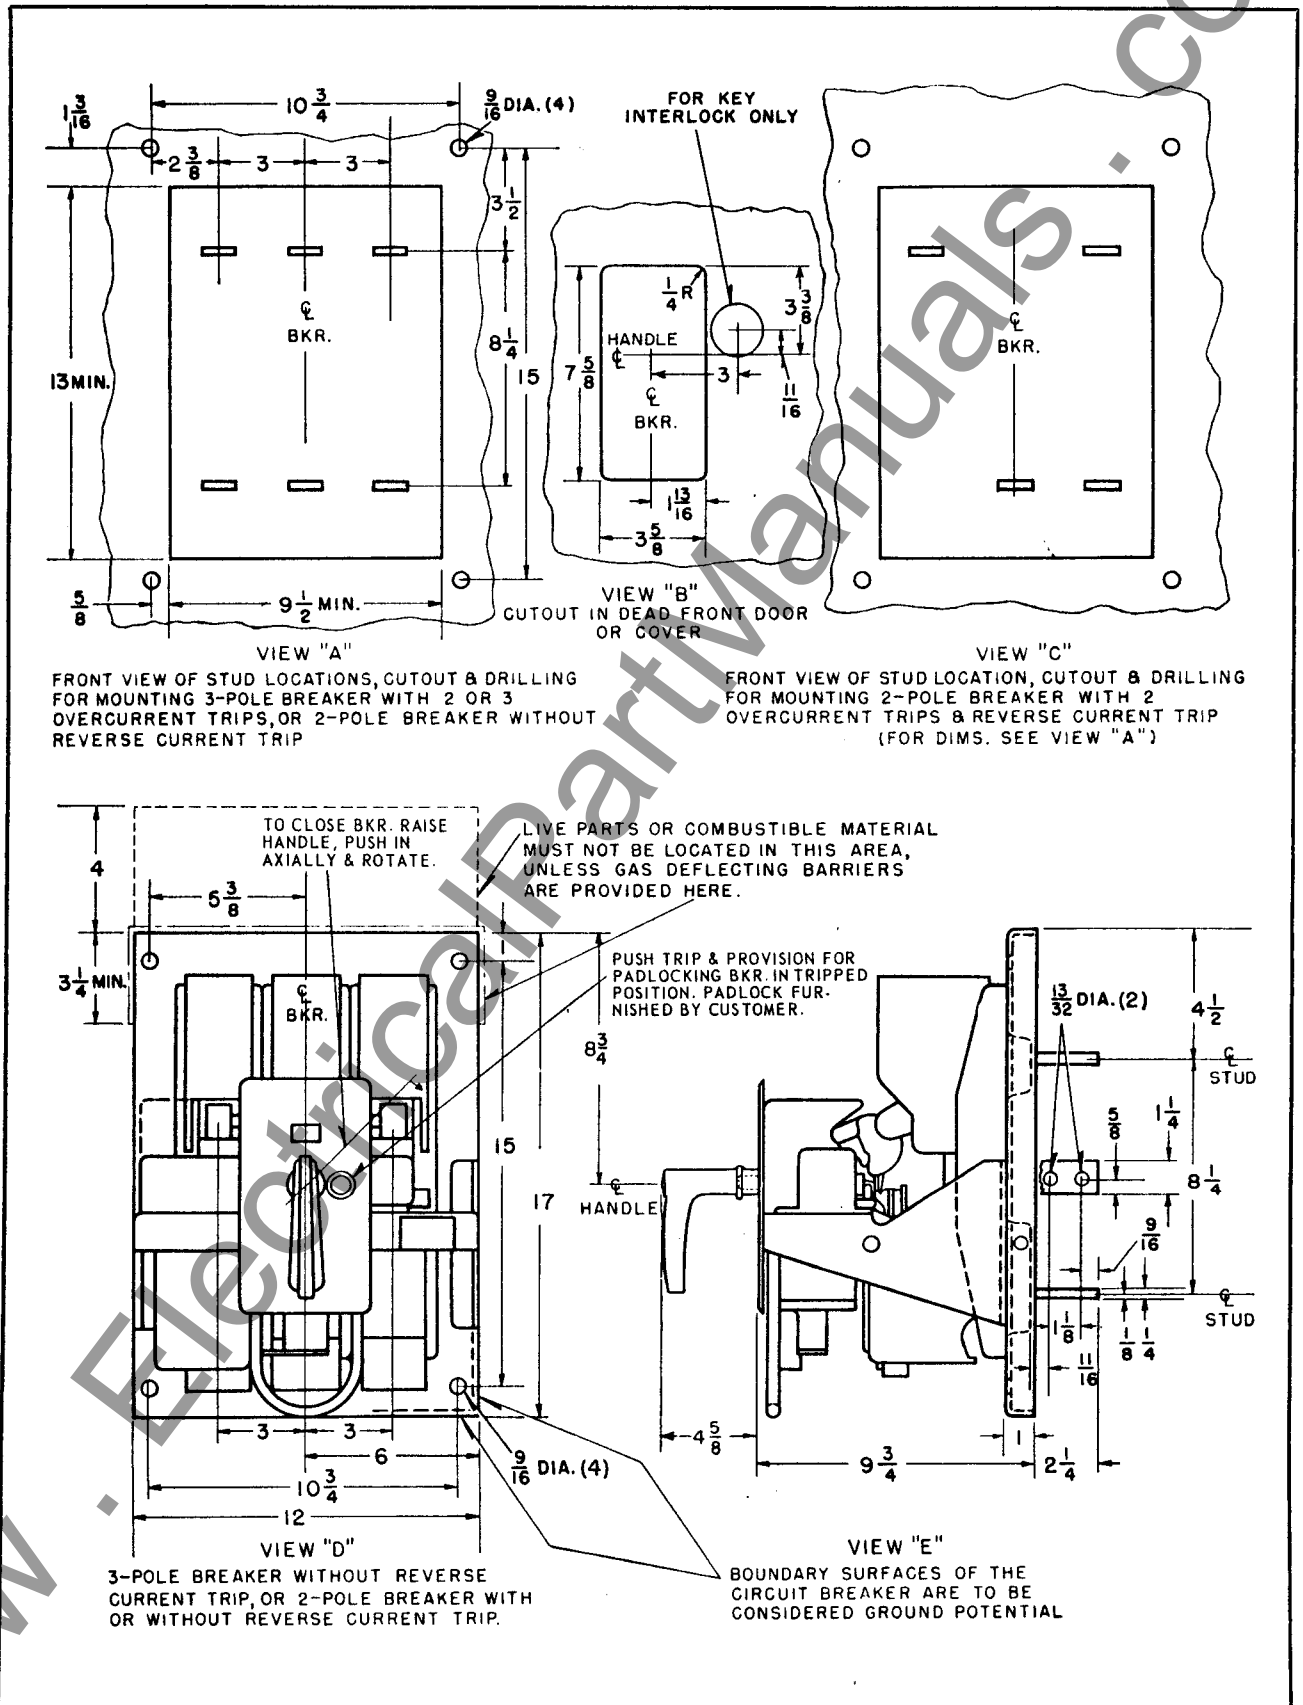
DB-15 Fixed Outline Dimensions and Mounting Details
